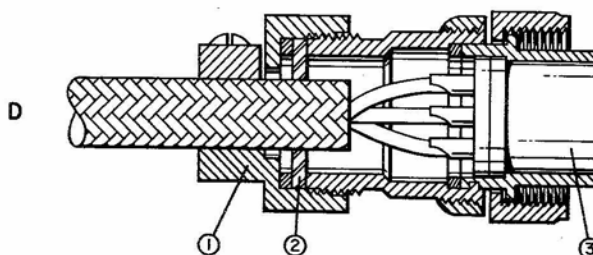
Fabrication of Audio Cable to Audio Plug P-104
